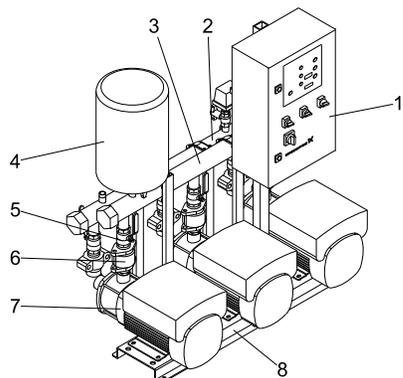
Front view of Hydro MPC CME pump system with three CM(E) pumps
